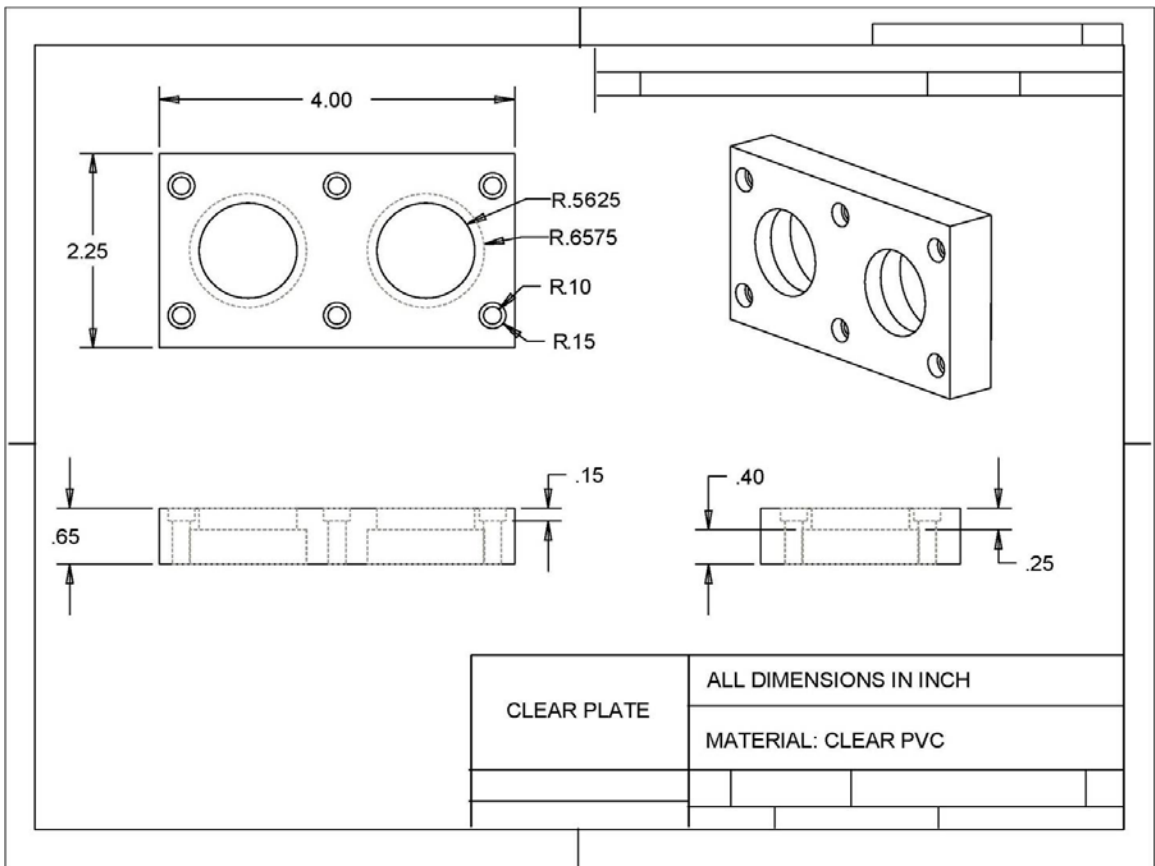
2D CAD model of clear plate with detailed dimensions. Figures are presented as the top, front, right hand and isometric views.
